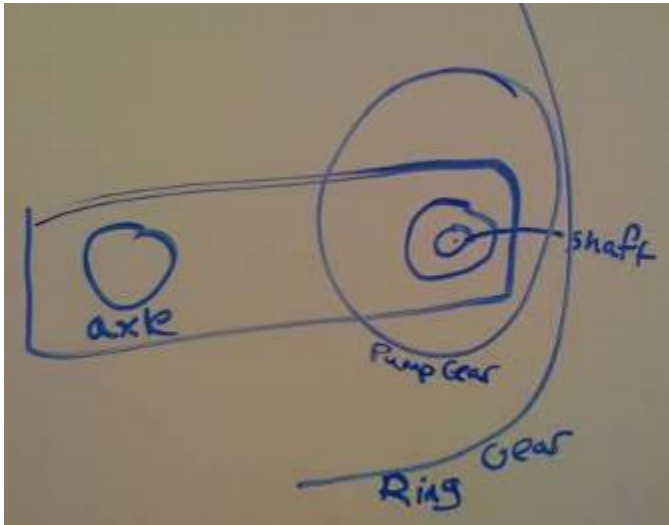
Side view of figure 38, where a bracket supports the pump shaft radially.
